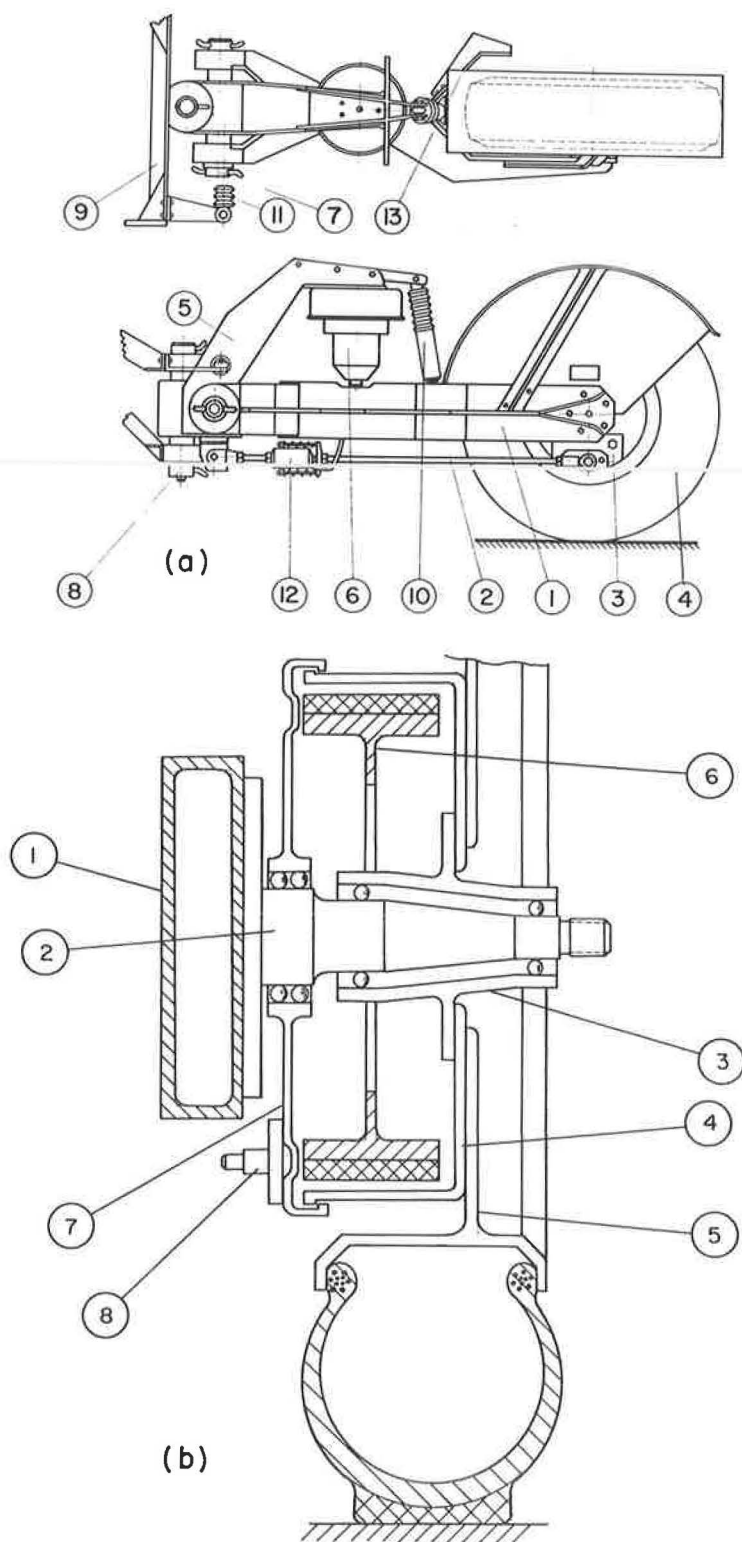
Penn State single-wheel parallelogram-type trailer: (a) design drawing; (b) wheel assembly.
